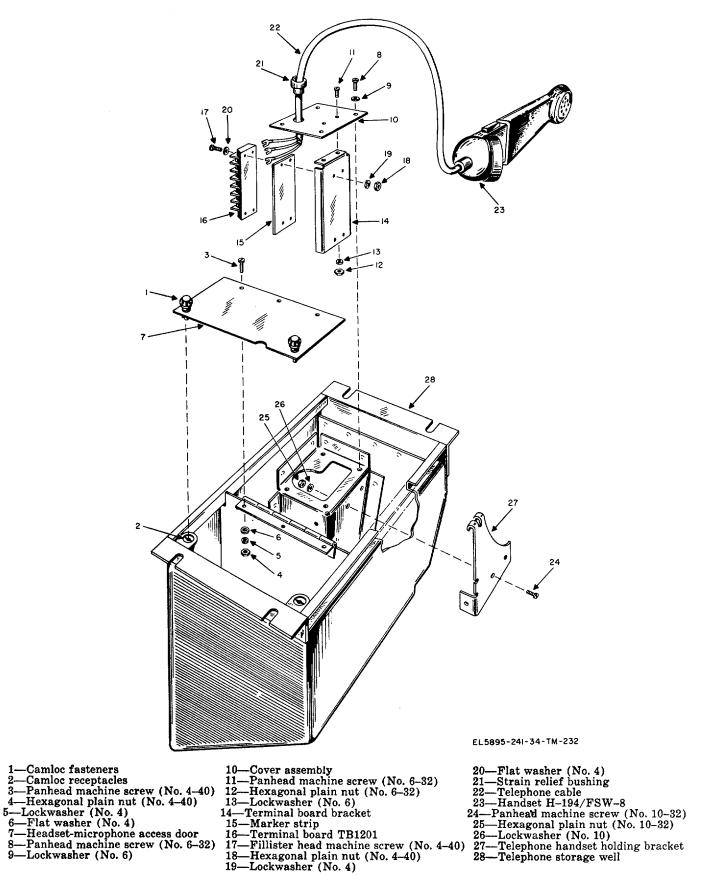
Telephone storage well (part of OA-2055/FSW-8), exploded view.
